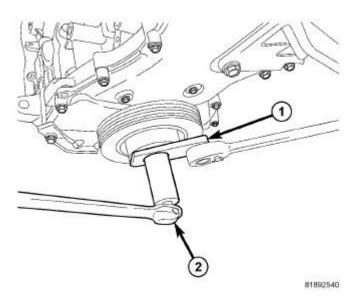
Removing/Installing Damper Bolt Courtesy of CHRYSLER GROUP, LLC
